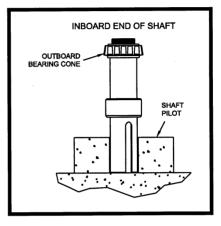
Placing Outboard Bearing Cone onto Shaft
